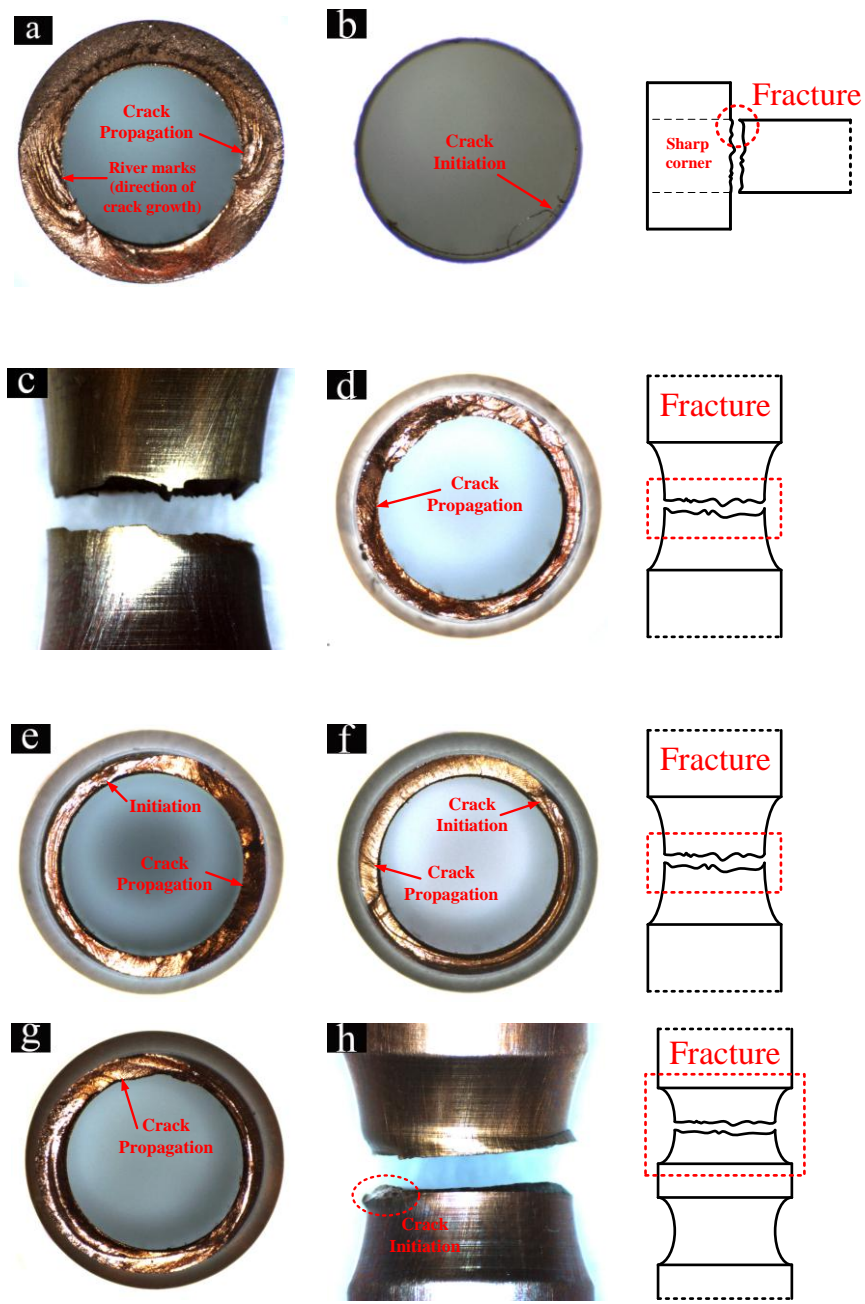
Fracture surfaces of specimens (Flange-model)
